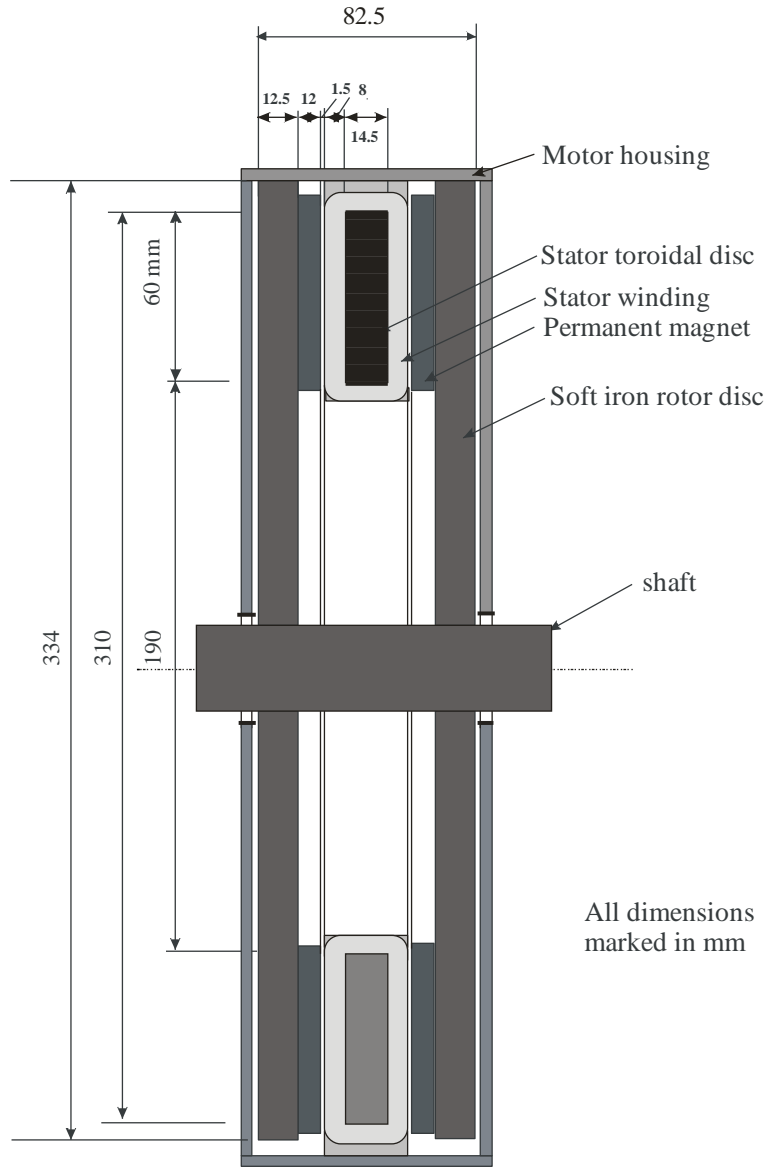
Dimensions and structure of AFTR PMBL motor
